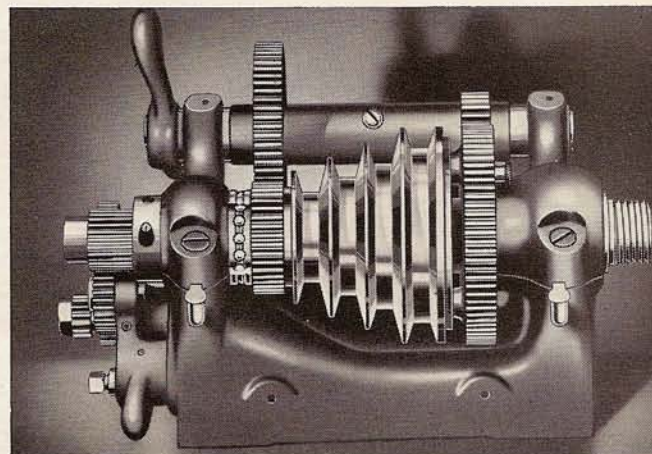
Headstock of 9-inch "Workshop" Lathe (with Gear Guards Removed) Showing 4-Step Cone Pulley for V-Belt Drive
